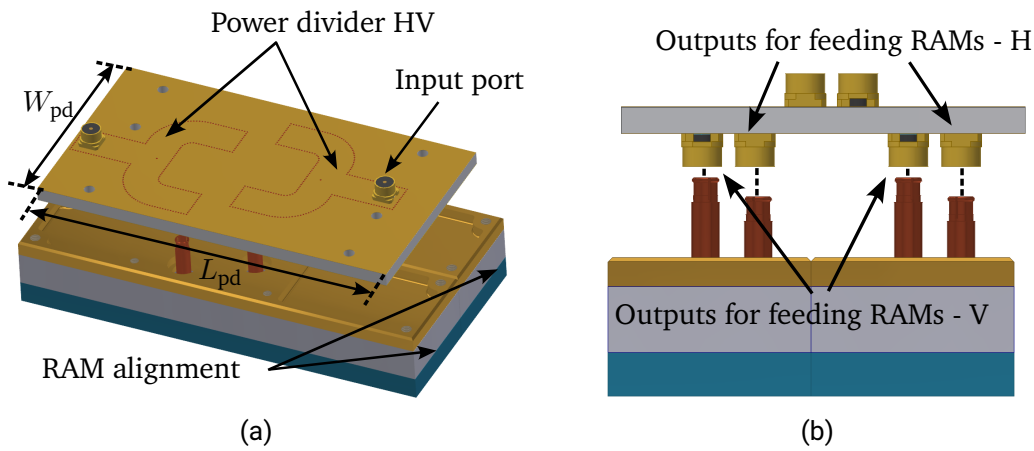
Feeding configuration 2: (a) Stacked assembly (b) Side view.
